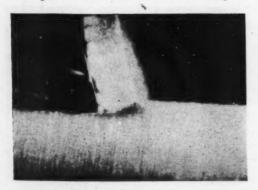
Photograph taken at 6,500 frames per sec. showing cold rolled steel being cut at 75 ft. per min. Cracks have formed in the chip
